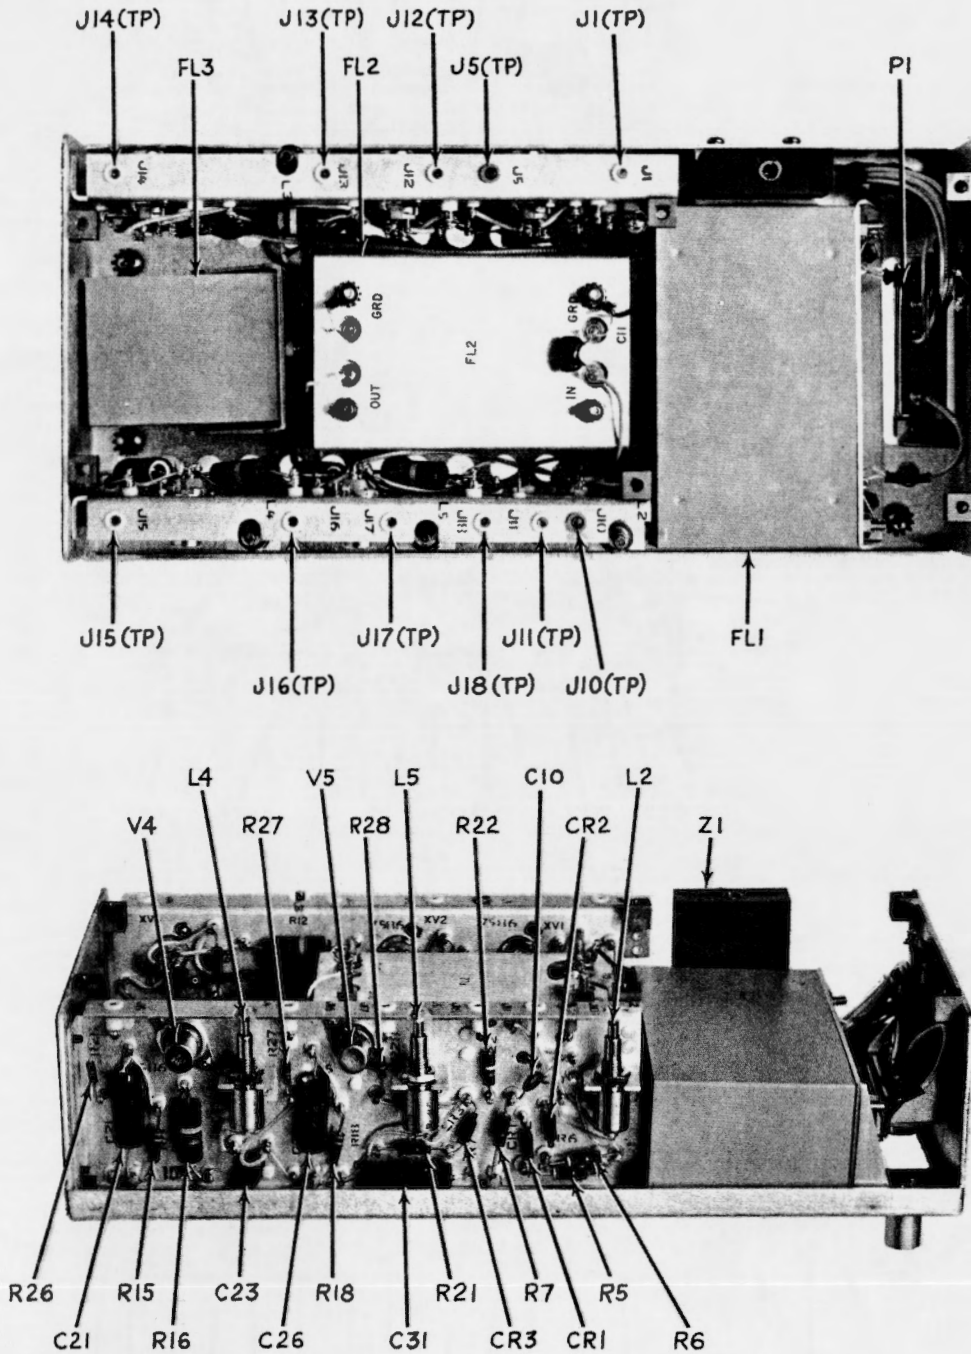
2nd Injector (B) A1A11, Parts Location and Test Points
